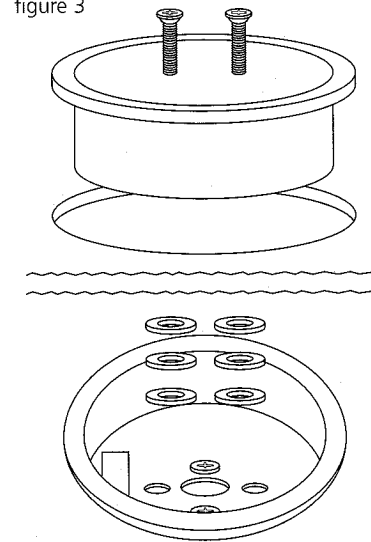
shows the orientation of the front cup, the washers and the rear cup. Insert the 8-32 x  $\frac{3}{4}$ " flat head screws through the dimpled holes of the front cup. Place the front cup into the mounting hole.
